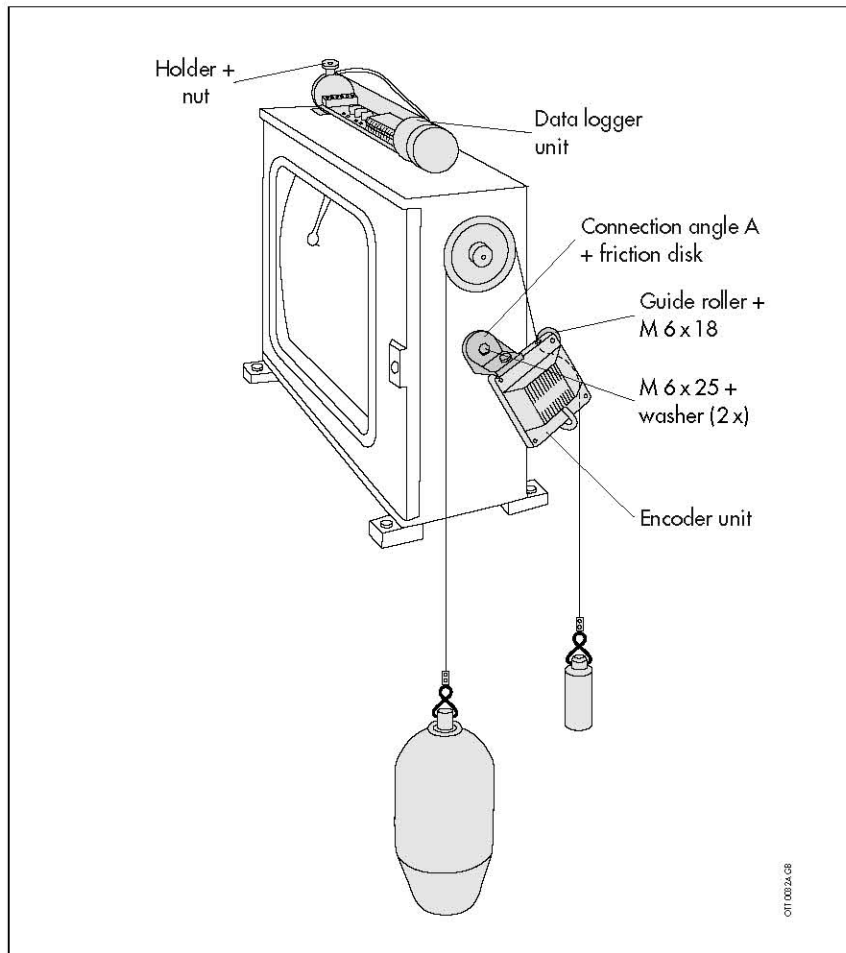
Example of attachment to Vertical Drum Recorder from another manufacturer
